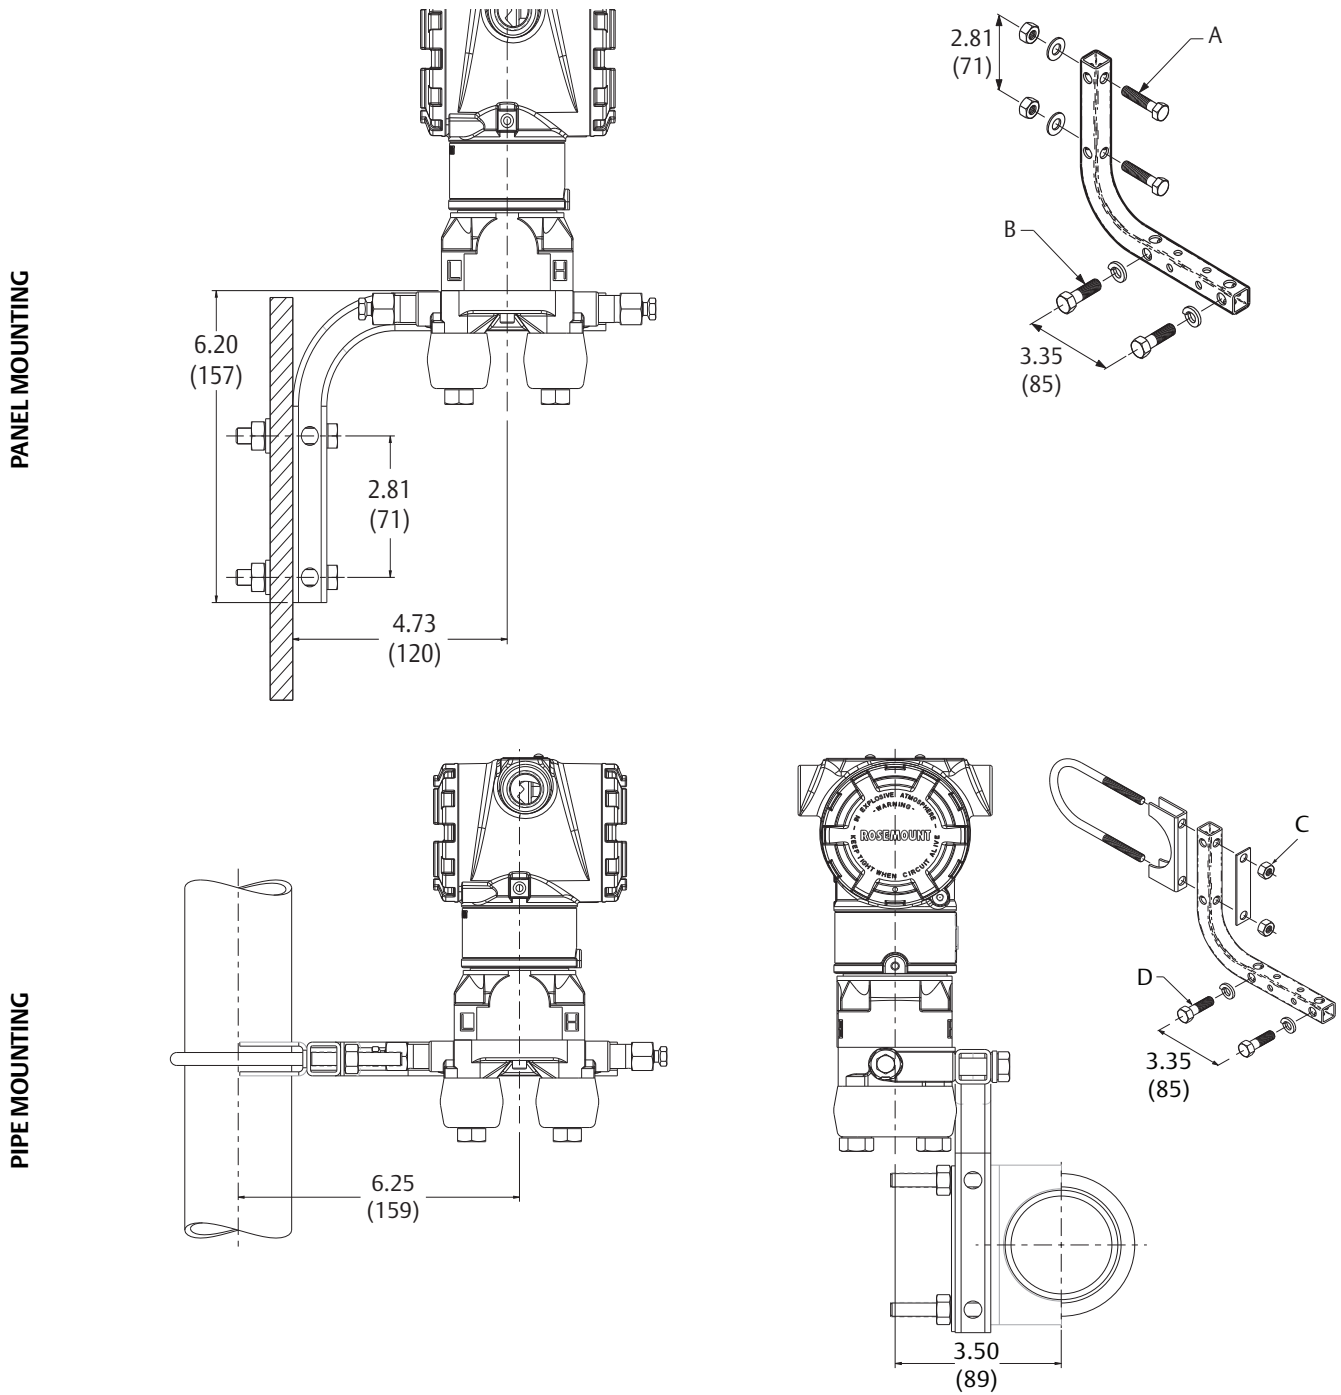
Rosemount 3051C Coplanar Flange with Rosemount 305RC3 3-Valve Coplanar Integral Manifold
